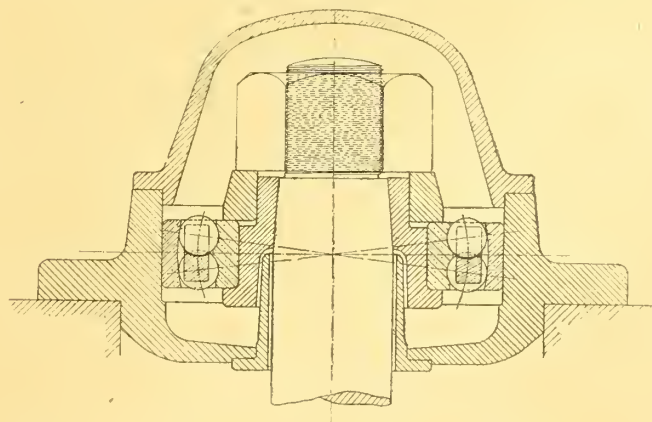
MOUNTING OF TOP RADIAL BEARING FOR VERTICAL SHAFT.
